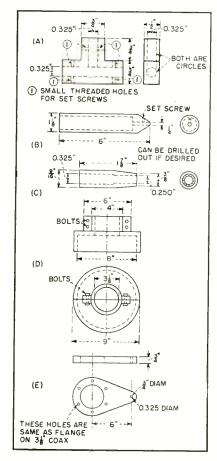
Dimensions of the parts used for matching sections and line attachment
